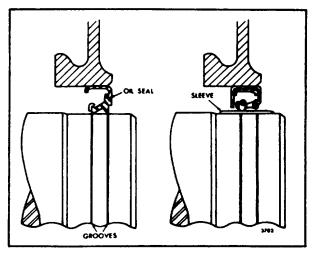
Use of Rear Oil Seal Sleeve on. Grooved Crankshaft
